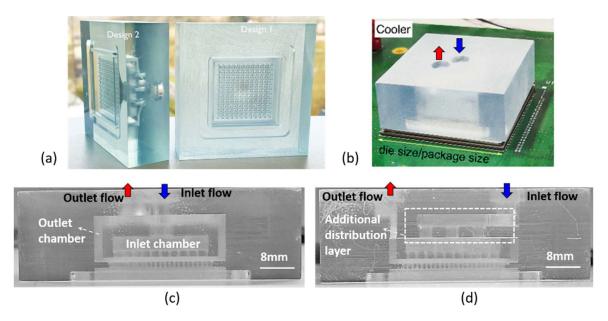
3-D printed cooler demonstrations. (a) Images of the demonstrated coolers with designs 1 and 2. (b) Cooler size is matched with large die/package size. (c) and (d) Side view of the transparent fabricated microfluidic heatsinks with internal liquid delivery microchannels.
